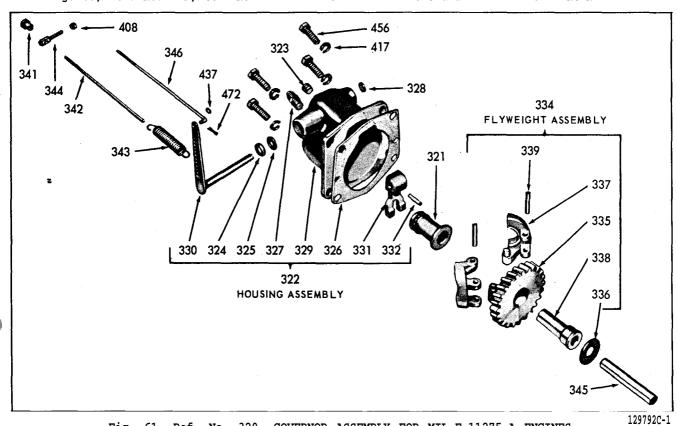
, Ref. No. 320, GOVERNOR ASSEMBLY FOR MIL-E-11275-A ENGINES Parts are identified by reference number. See parts list for correct part number.
